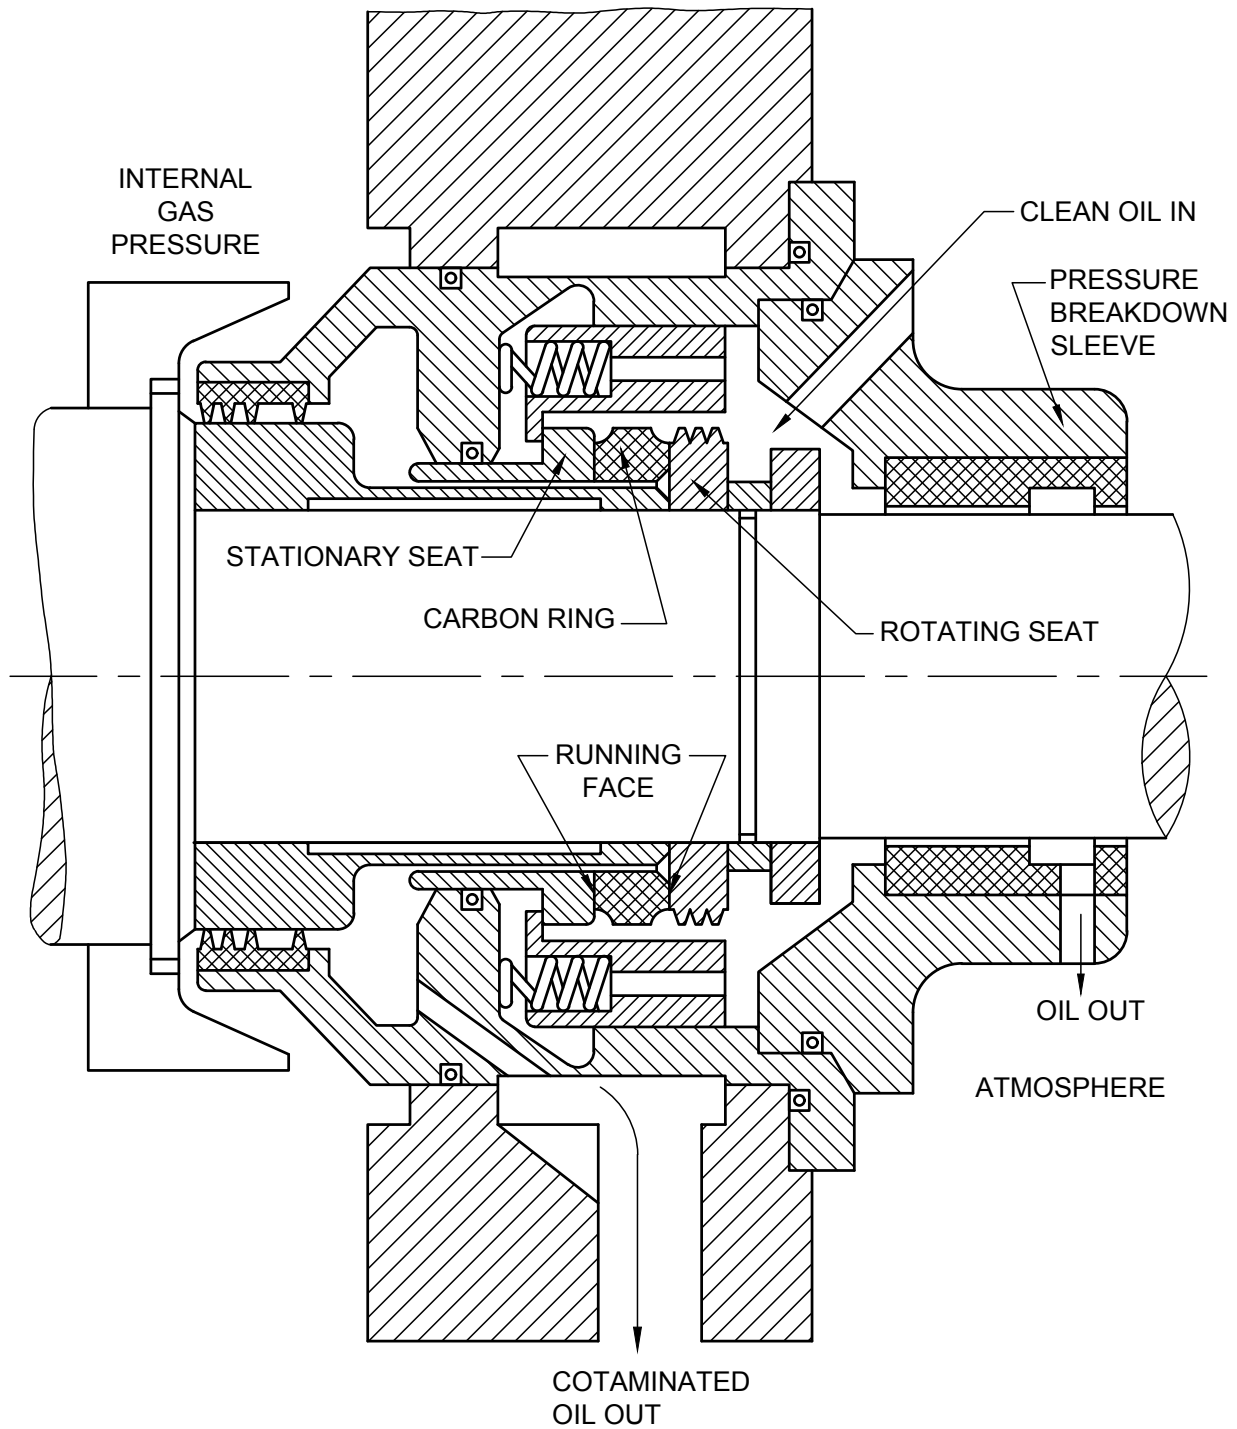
MECHANICAL (CONTACT) SHAFT SEAL
